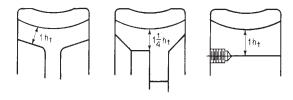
Gear-blank shapes. (Source: Demag Delaval.)
